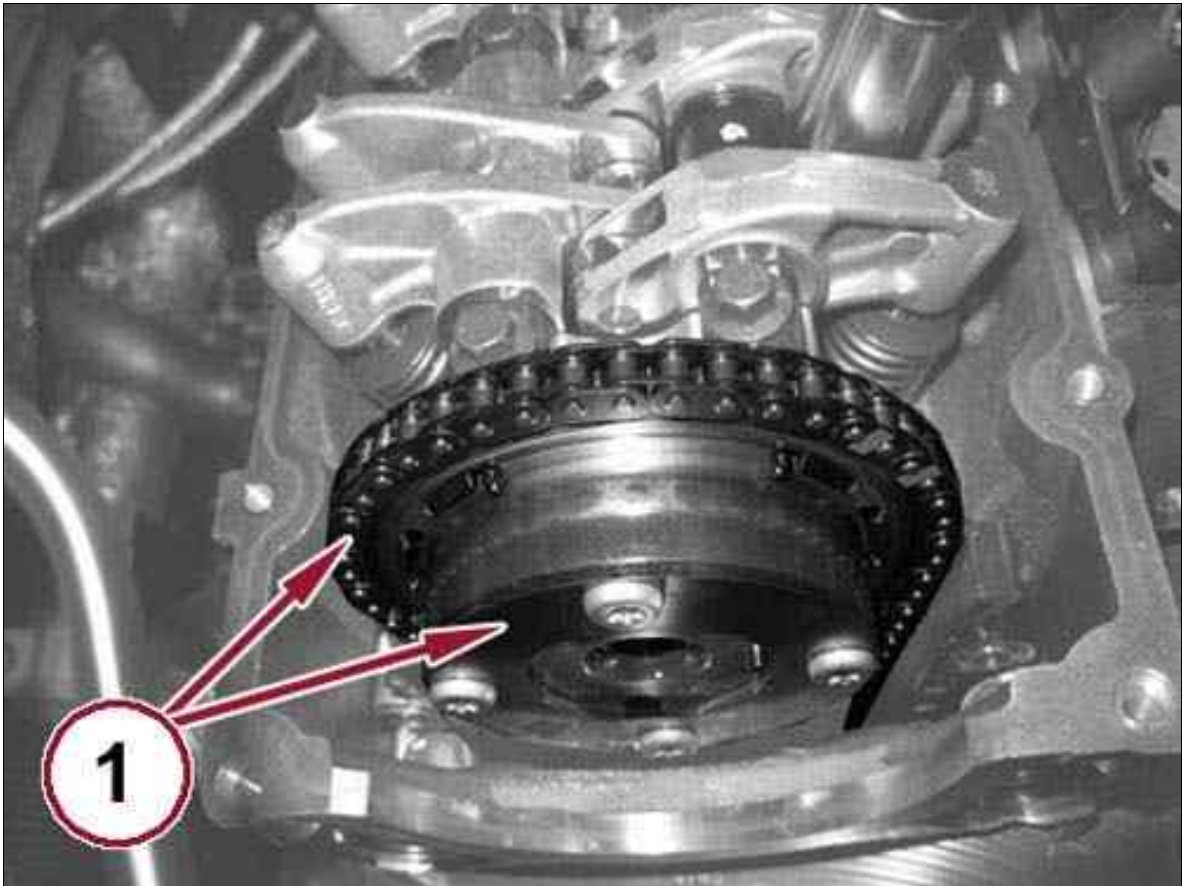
Removing Bolt Fixing Variable Valve Timing System & Toothed Wheel
